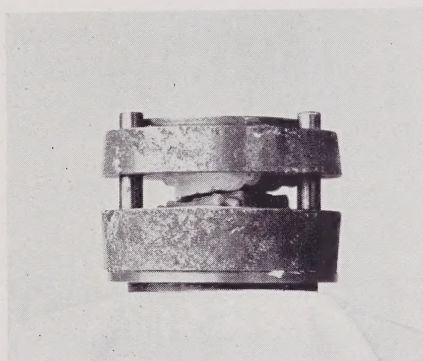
The flask assembled, male part resting lightly in position on the packed female part.
